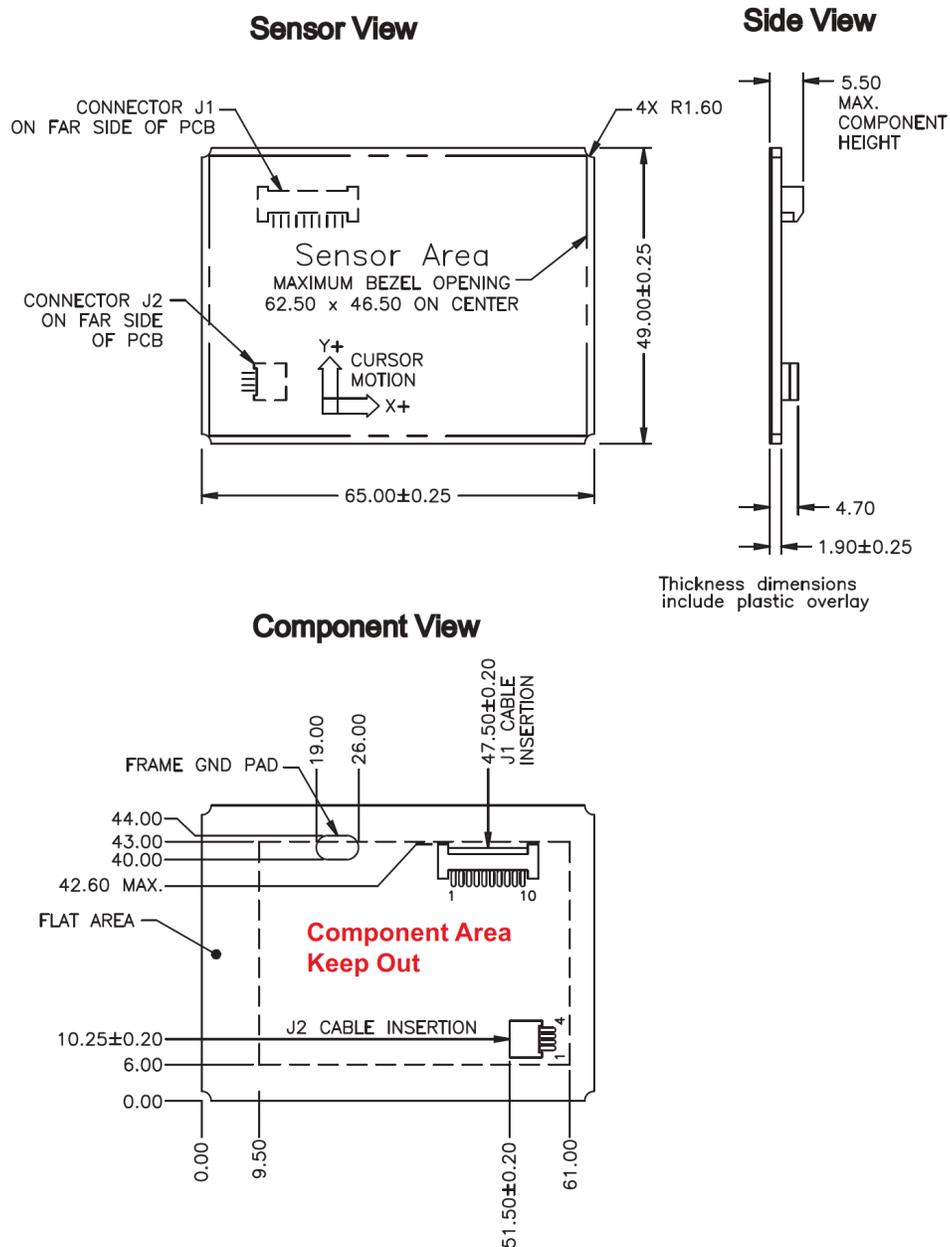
TM065049-2 Physical Dimensions - Sensor, Component, and Side Views
